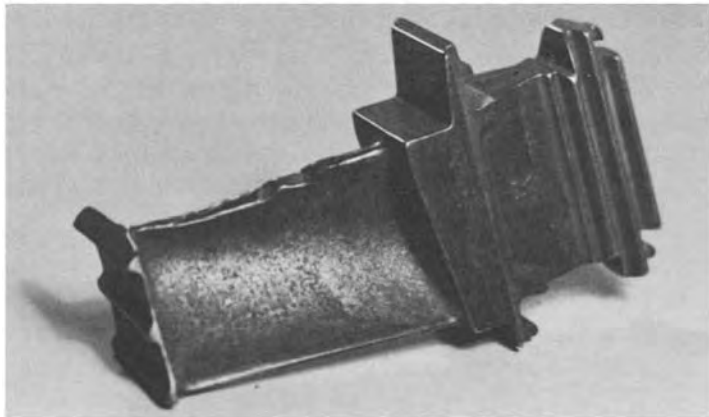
High-temperature erosion-corrosion in a turboprop engine blade. Most of the 1½ in. long blade had been damaged by sulfidation, or hot corrosion caused by excessive sulfur in the fuel. This uncoated INCO 713 turbine blade was one of many such rotary blades subjected to this type of high-temperature erosion-corrosion. Nickel aluminide coatings are sometimes applied to the nickel-base alloy in order to improve the life of the blades.
